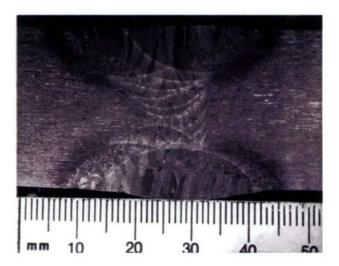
Macrograph of Ti-5111 Double-bevel GTAW K-Joint, Code HGC
